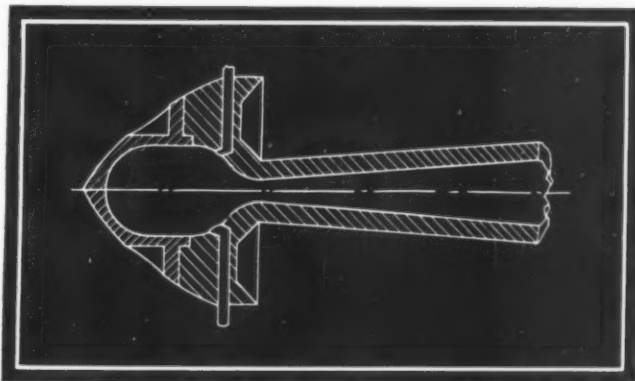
One type of rocket motor, showing combustion chamber for liquid oxygen and gasoline
